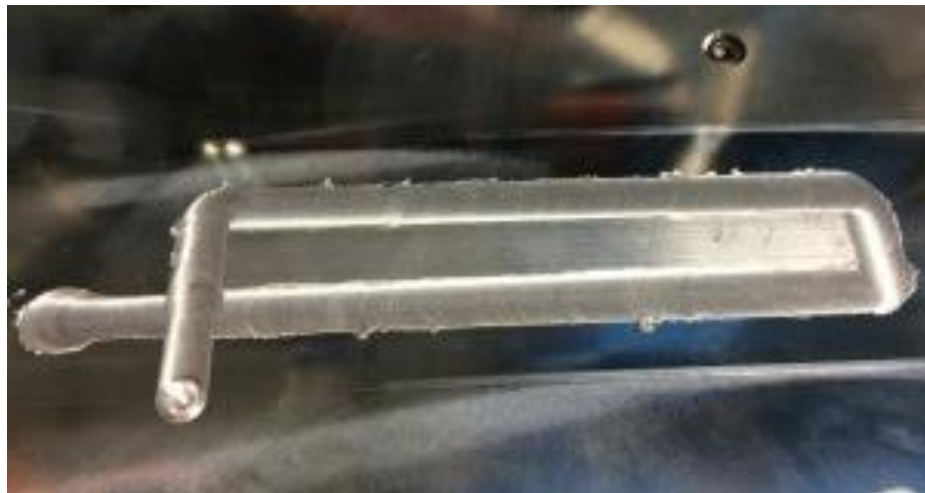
Fabrisonic's use of friction stir welding in combination with ultrasonic additive manufacturing to create solid-state manufactured heat exchangers. [4]
